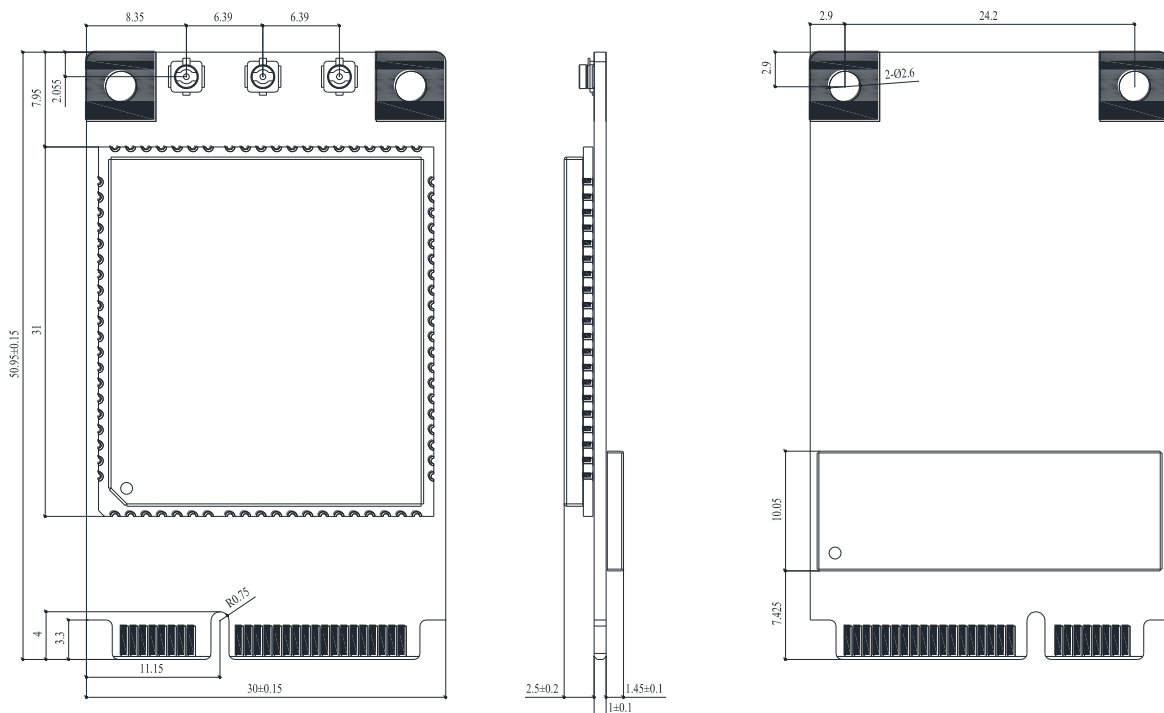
Mechanical Dimensions of EC200U Series Mini PCIe
